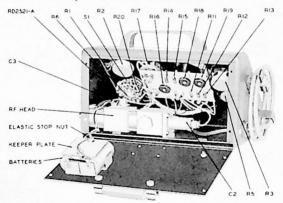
Interior View—Component Layout, Including Mounting Of Batteries.
